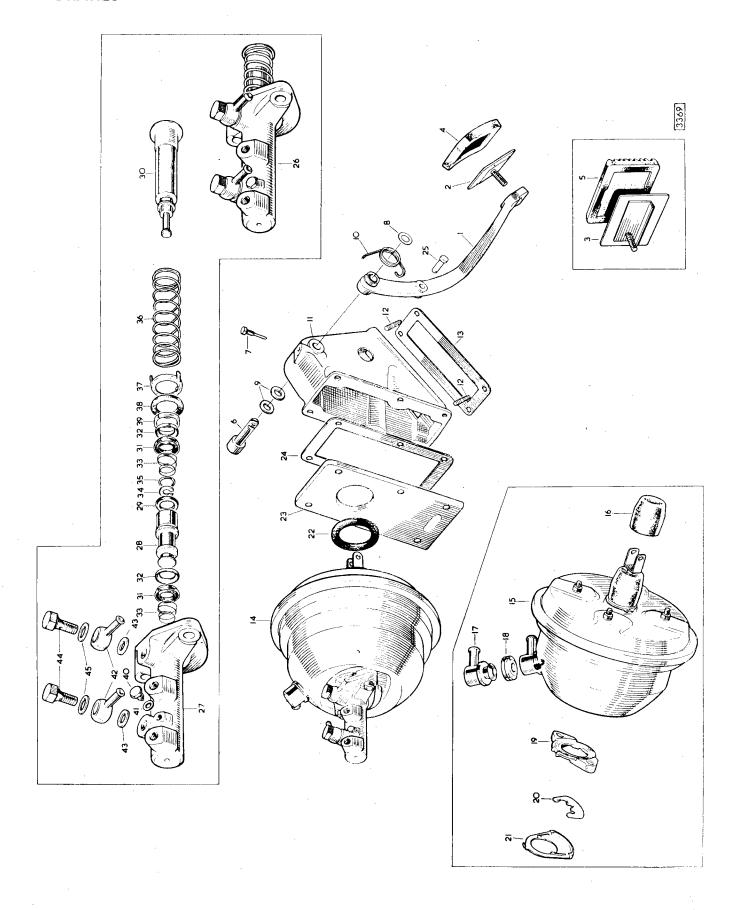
Exploded view of booster, master cylinder and pedal shaft housing.
